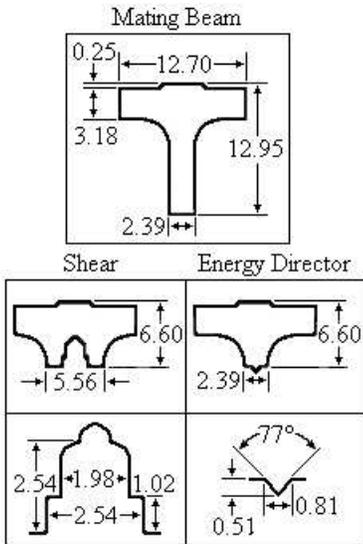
AWS I-Beam Welding Test Specimen (mm)
